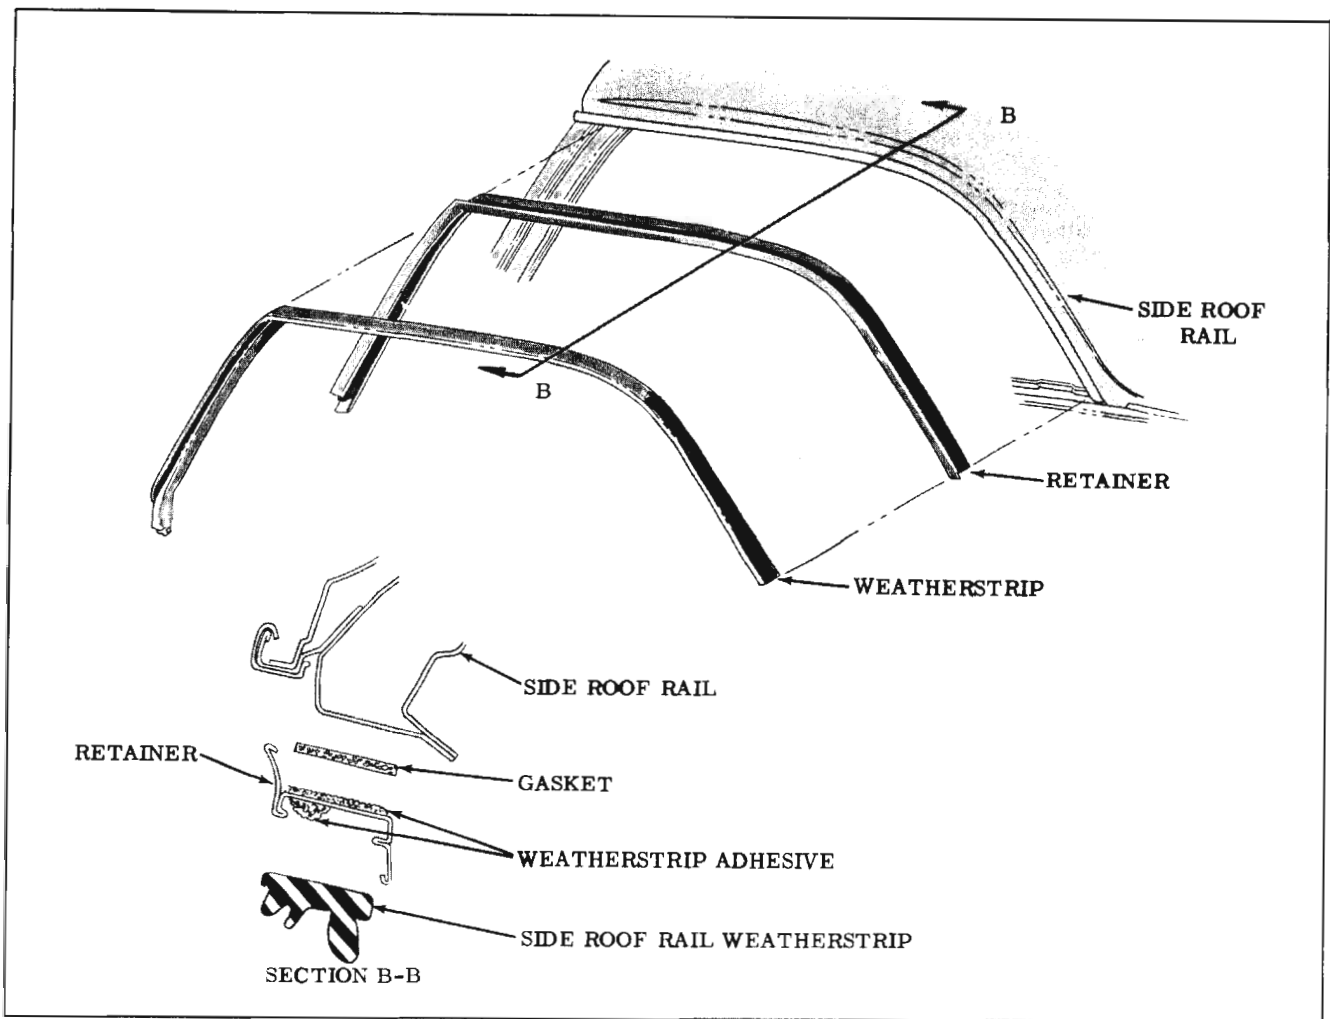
Side Roof Rail Weatherstrip Assembly (47" Style)
